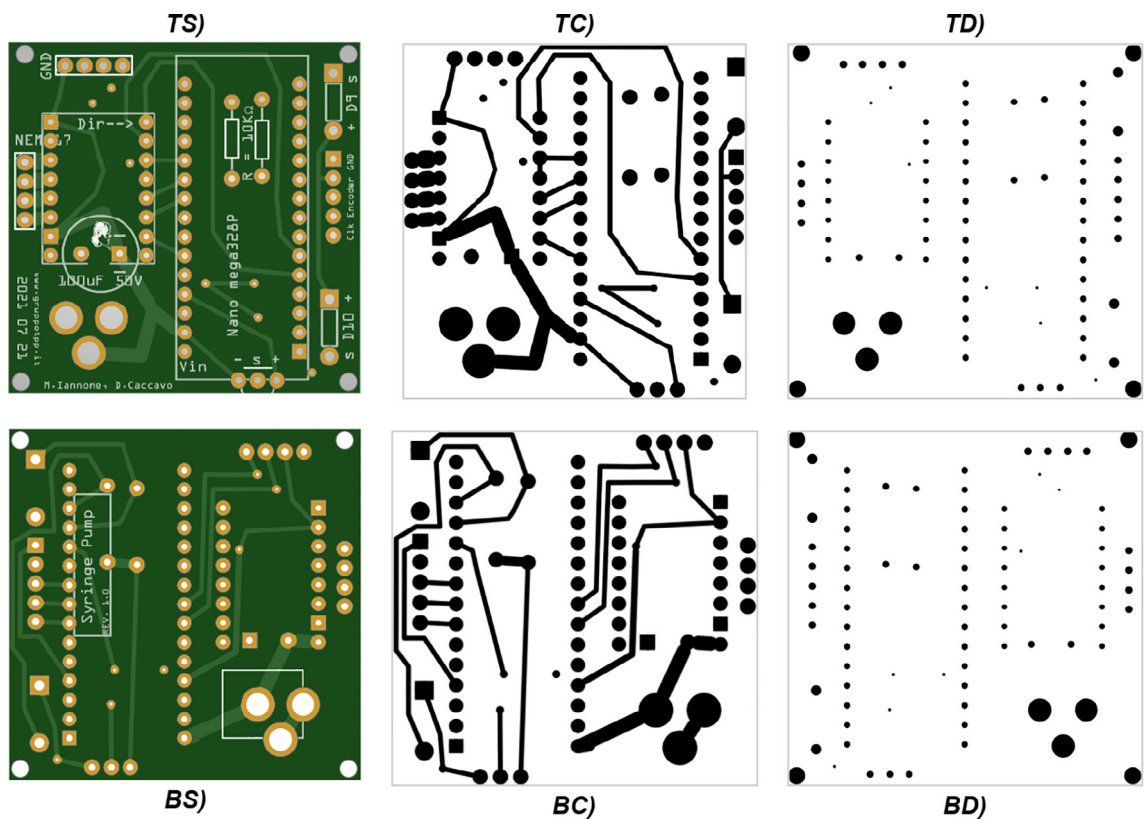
PCB specify. TS) Top Silk; TC) Top Copper; TD) Drill position from Top; BS) Bottom Silk; BC) Bottom Copper; BD) Drill position from Bottom.
